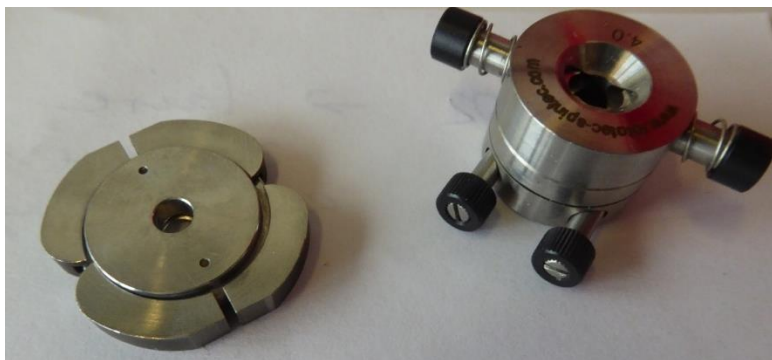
Two types devices, designed for the cap removal of 4 mm rotors
